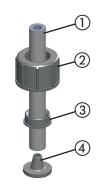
Hose clip 6/12 (internal and external diameter in mm)
